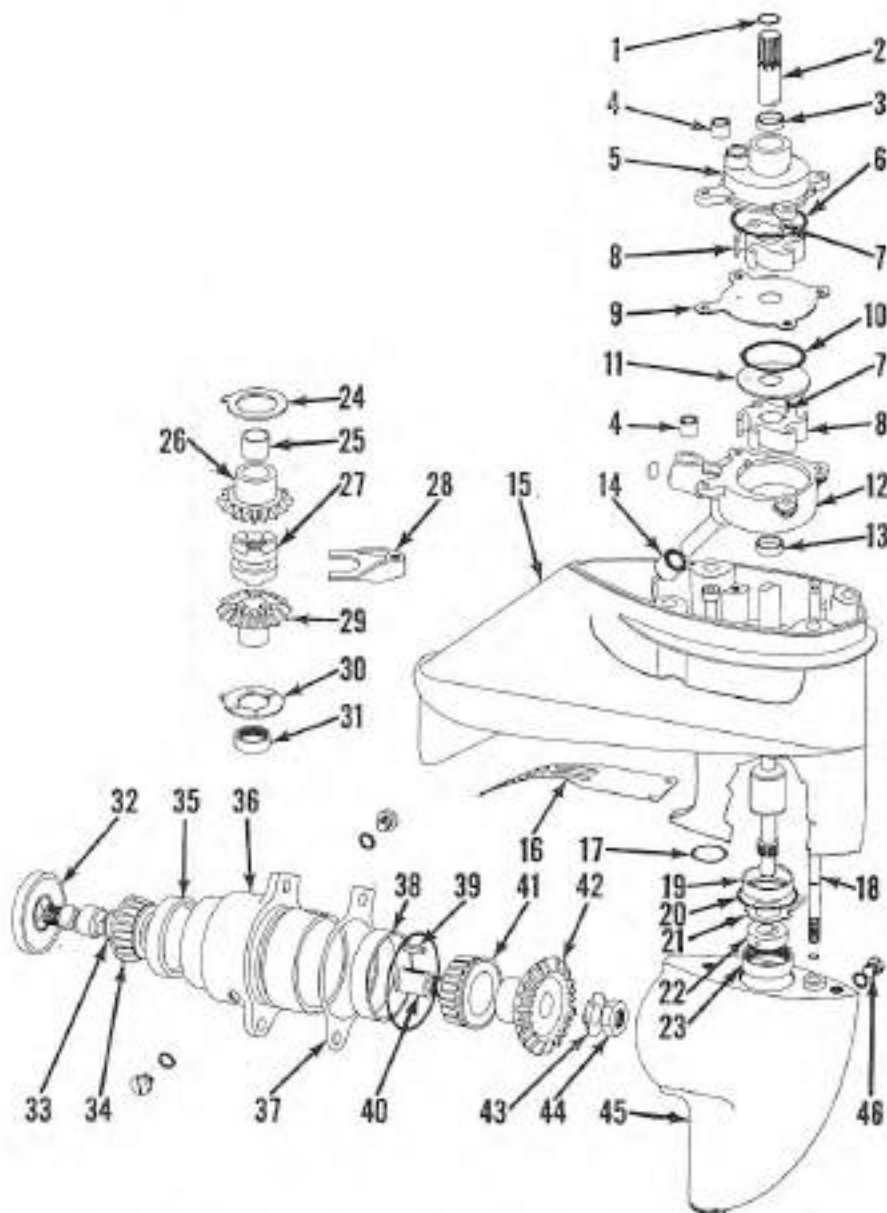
Exploded view of gearcase housing, water pumps and associated parts.
